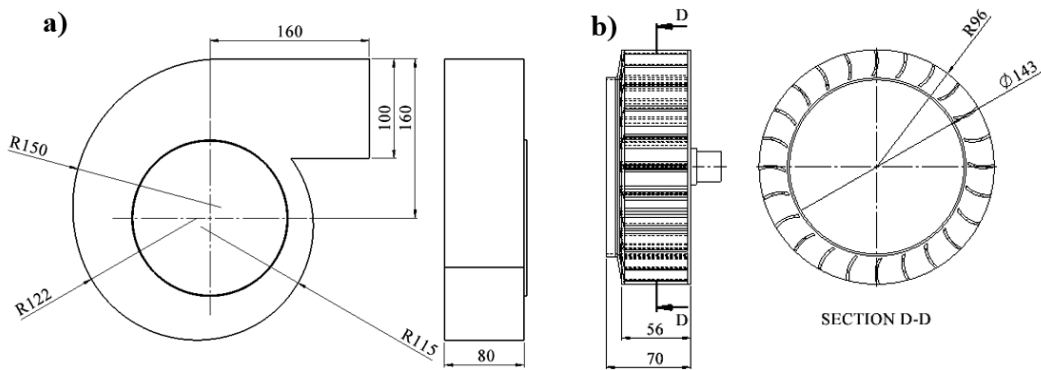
The main dimensions of centrifugal impeller casing and blade [27]
